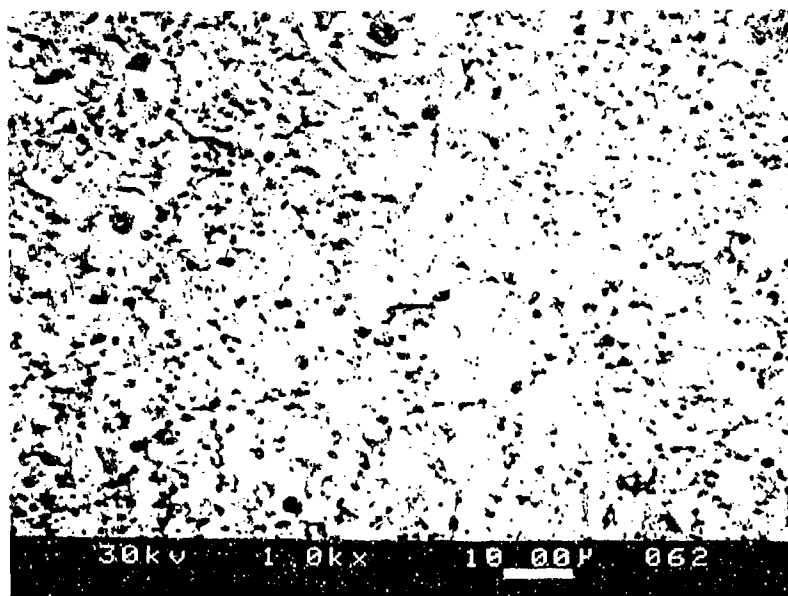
SEM micrograph showing magnified view of the wire EDM inner diameter surface of Bushing 3, at 1000X.
